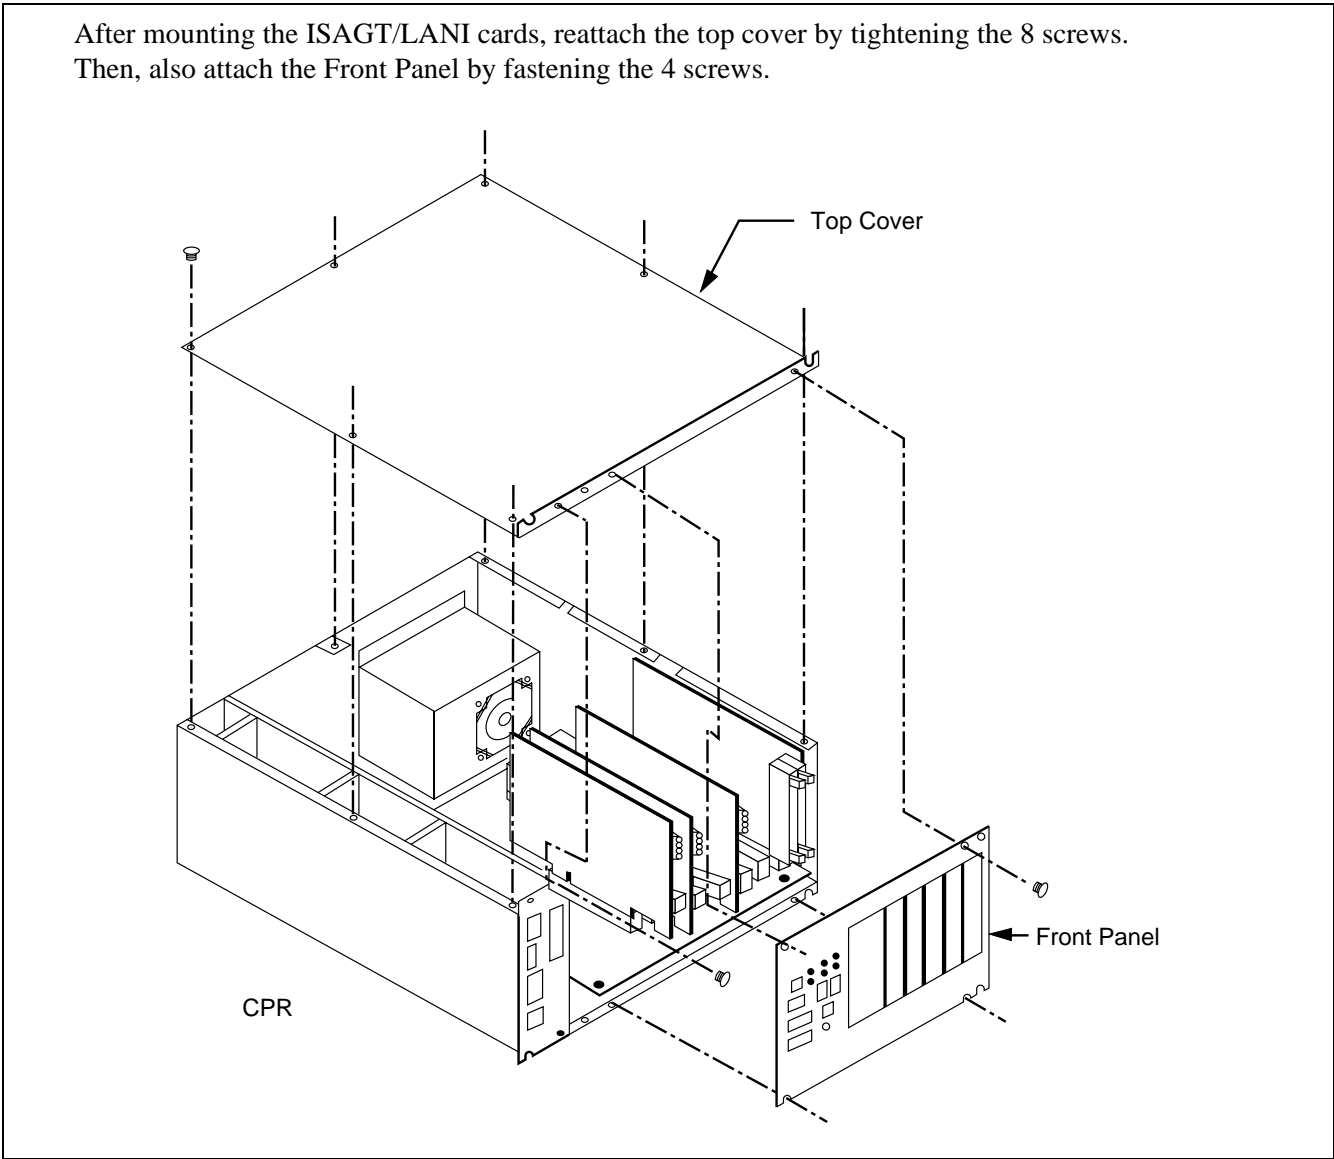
Reattachment of CPR Top Cover and Front Panel
